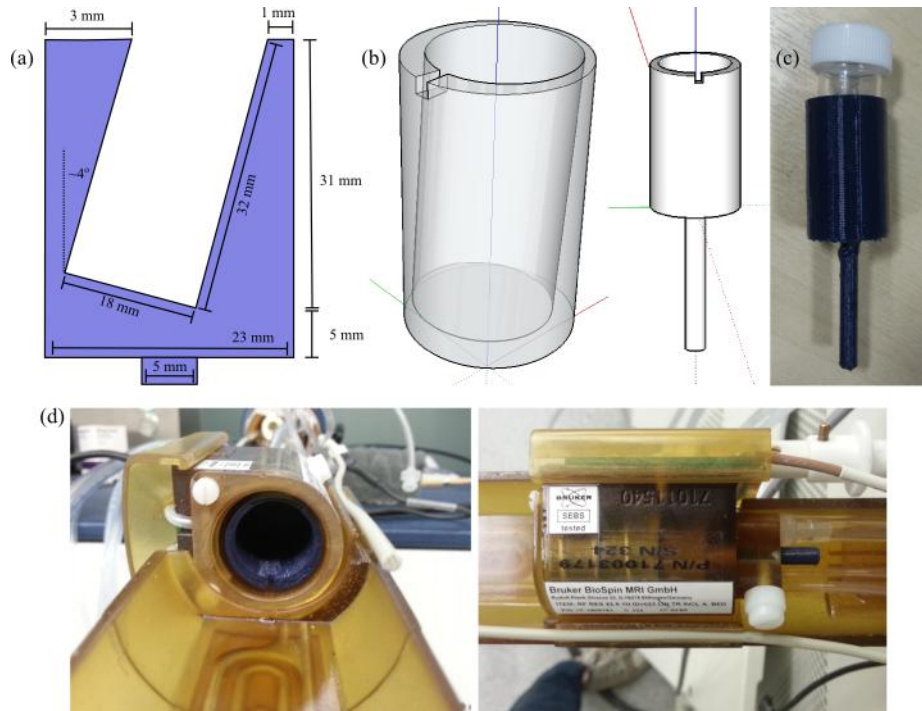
Sample holder for MR imaging (a) schematic diagram, (b) 3D sketch and, 3D printed sample holder inside the holder: (c) frontal and (d) superior views.
